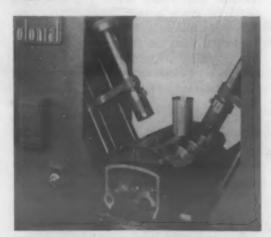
The chilled sleeves being pressed into the cylinder block.
